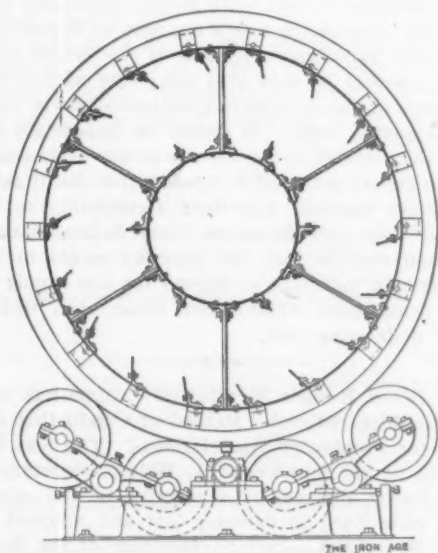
Cross Sectional Elevation of a Dryer, Showing the Drive and Interior Disposition of Flights.
